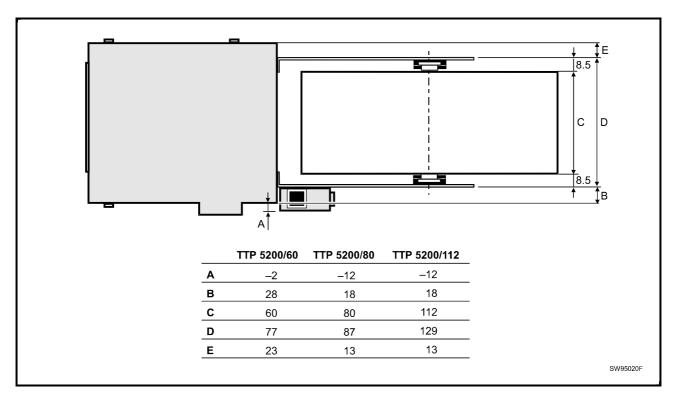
Top view. TTP 52XX models equipped with the optional paper roll holder for up to 200 mm roll diameter.
